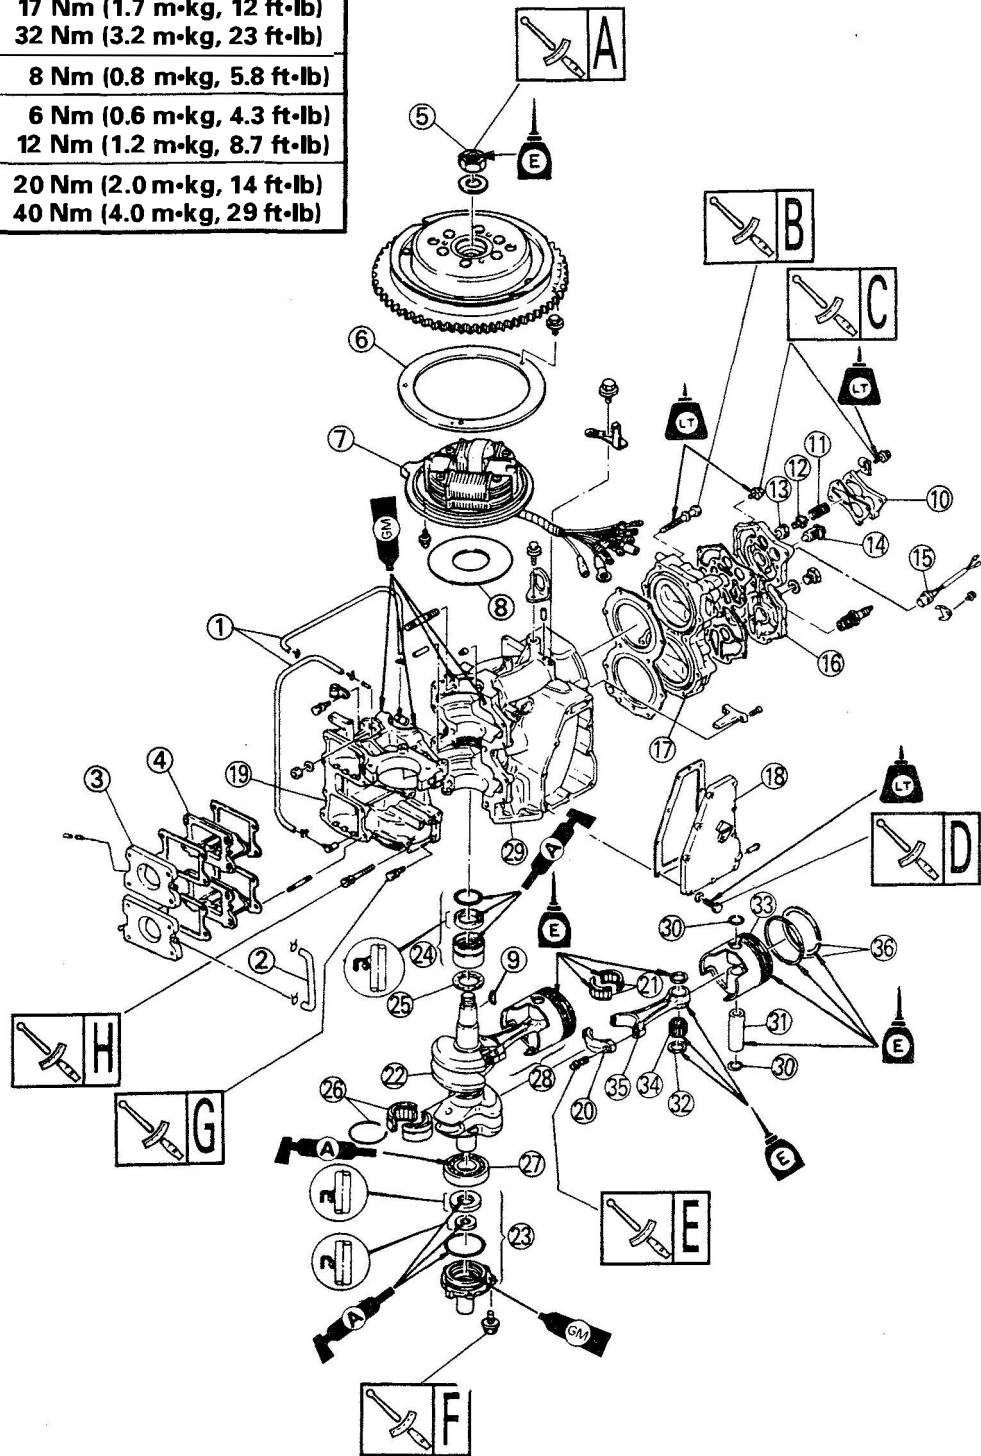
Exploded view of a typical 40-55 hp 2-cylinder powerhead with major parts identified - 48/55 hp unit shown, others similar
